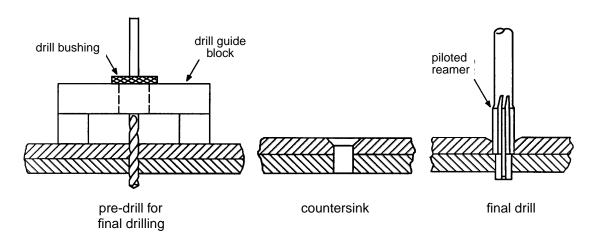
Hole Preparation for Flush Head Rivets (Countersink Installation)
